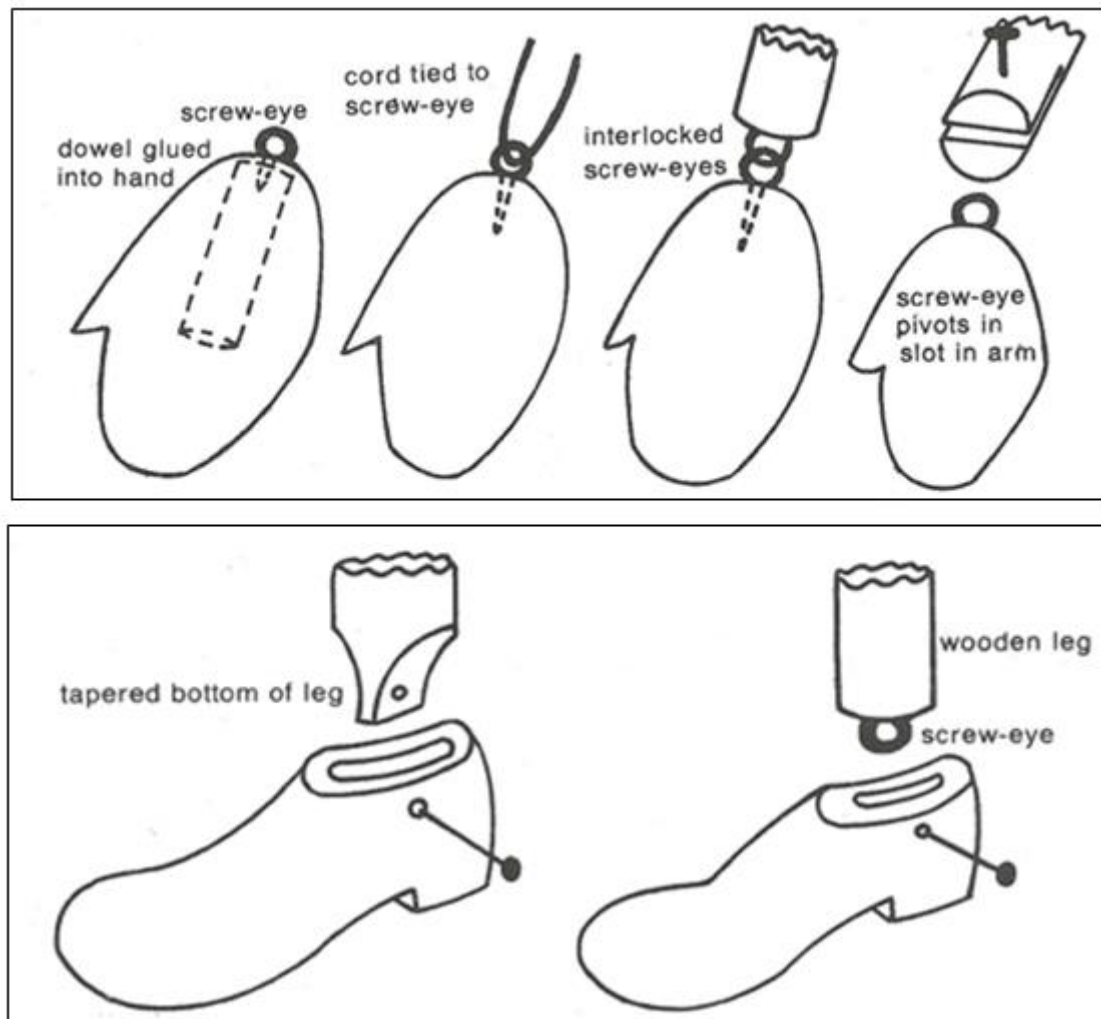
Ankle and Wrist Joints (Currell, 1980: 91, 93)
